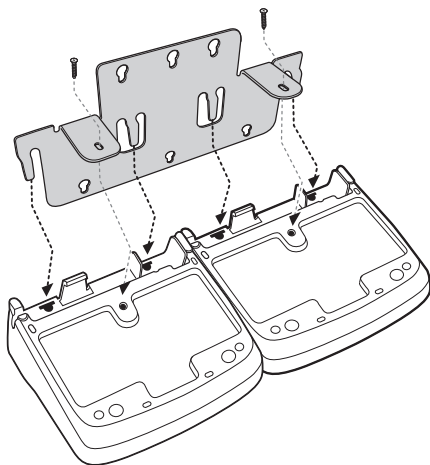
Insert Bracket into SAC5000-8000CR Cradle
